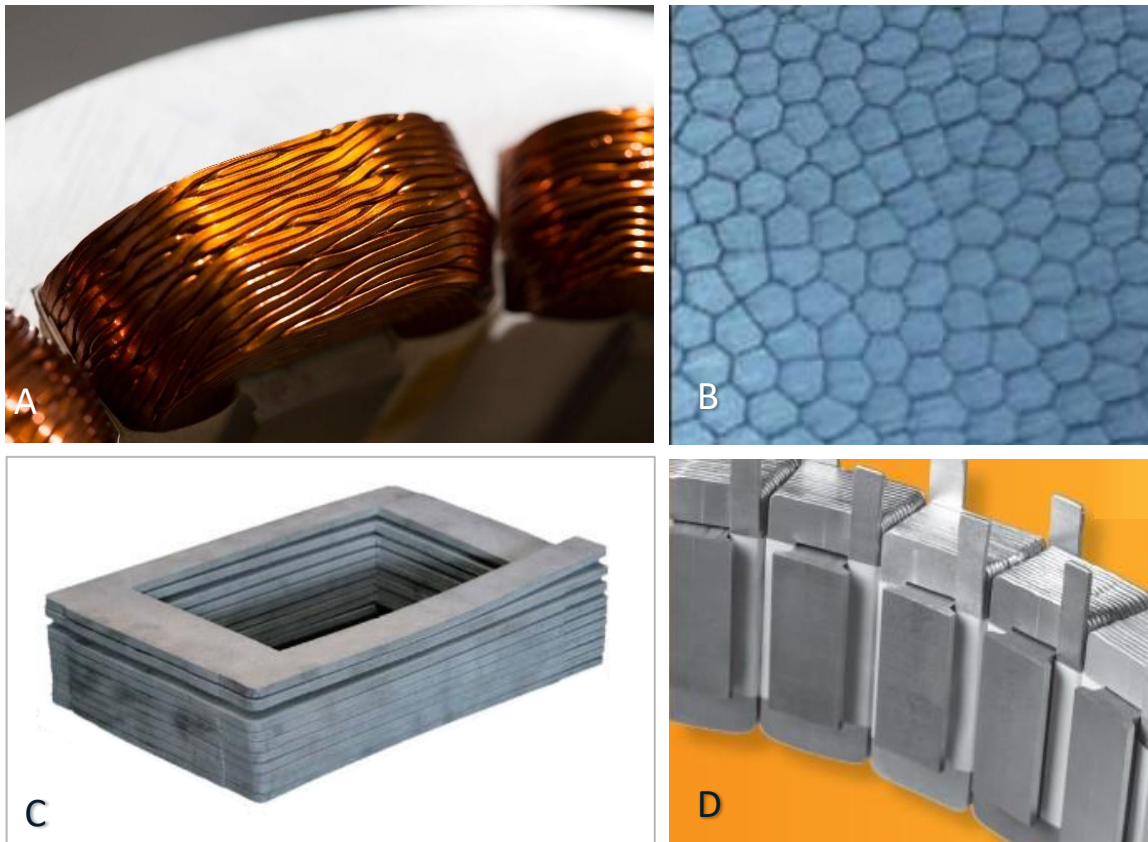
A: Compressed aluminum stator coil (AEM UK), and B), B: cross-section of the compressed aluminum coil, Cand D: die-cast aluminum coils C and D
